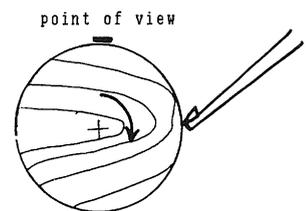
Surfaces at machined step of quarter section in peripheral turning.
